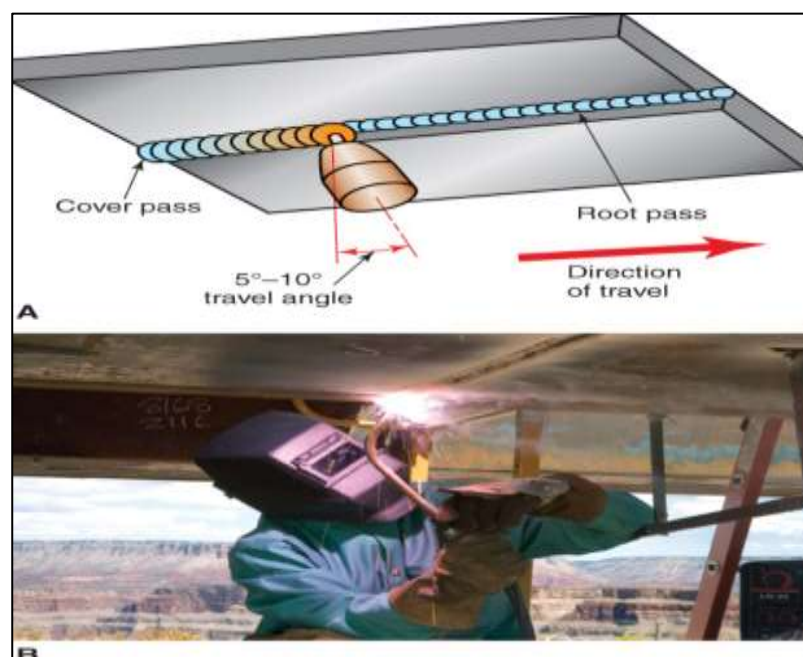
Overhead Welding Position (Bale, 2022; Rohit Chitnis, 2023)
